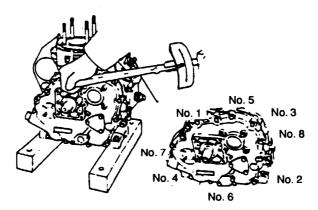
lightening Sequence for Crankcase Cover Sorts
